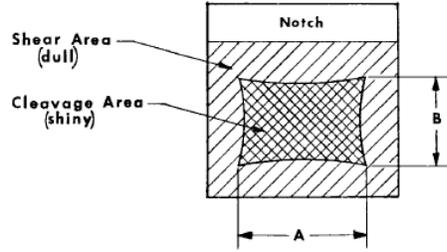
Fracture surface of a Charpy V-notch impact specimen. (ASTM-E23, 2005)
